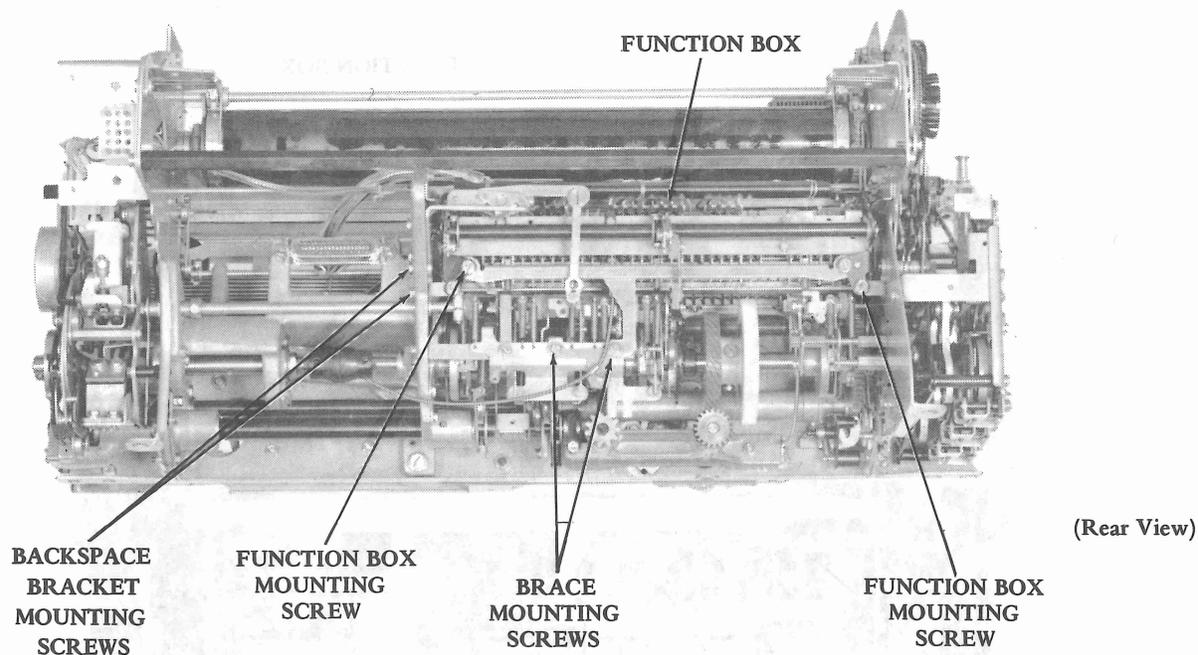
Function Box and Trip Shaft Assembly – Wide Platen Unit
